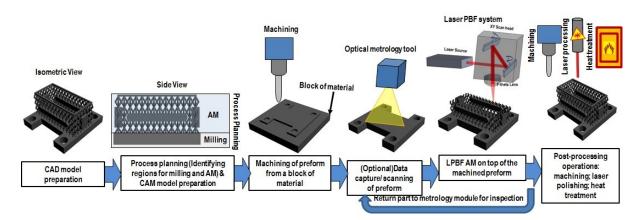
The processing steps of the laser-based process chain, which combines PBF with Machining
